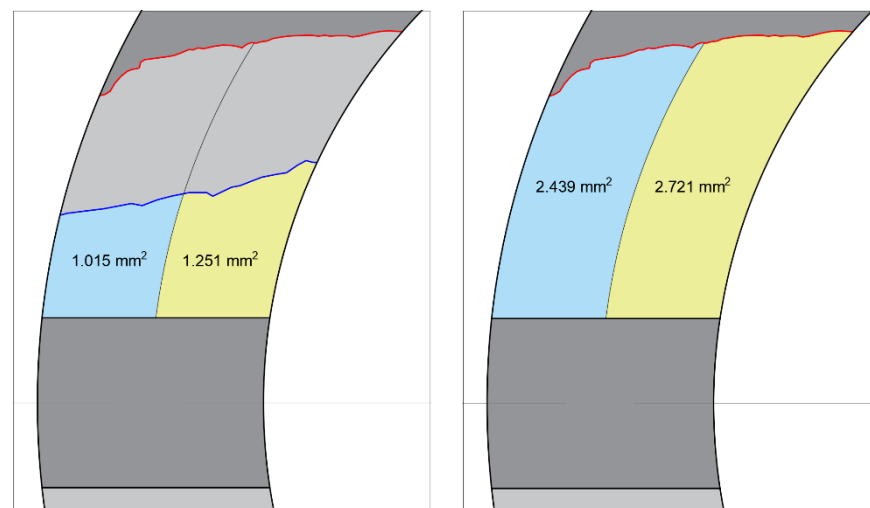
Specimen of 2 mm thickness, left until overload, right until final fracture, fracture areas associated with Re and Ri.
